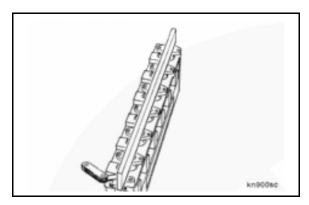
MEASURE THE FLATNESS OF THE EXHAUST MANIFOLD MOUNTING SURFACE
